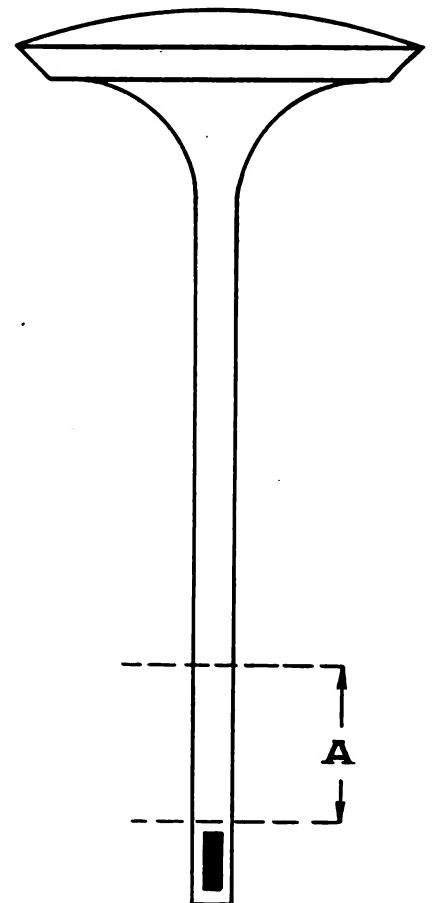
THE VALVE STEM MAY BE DRAWN OUT AT A
